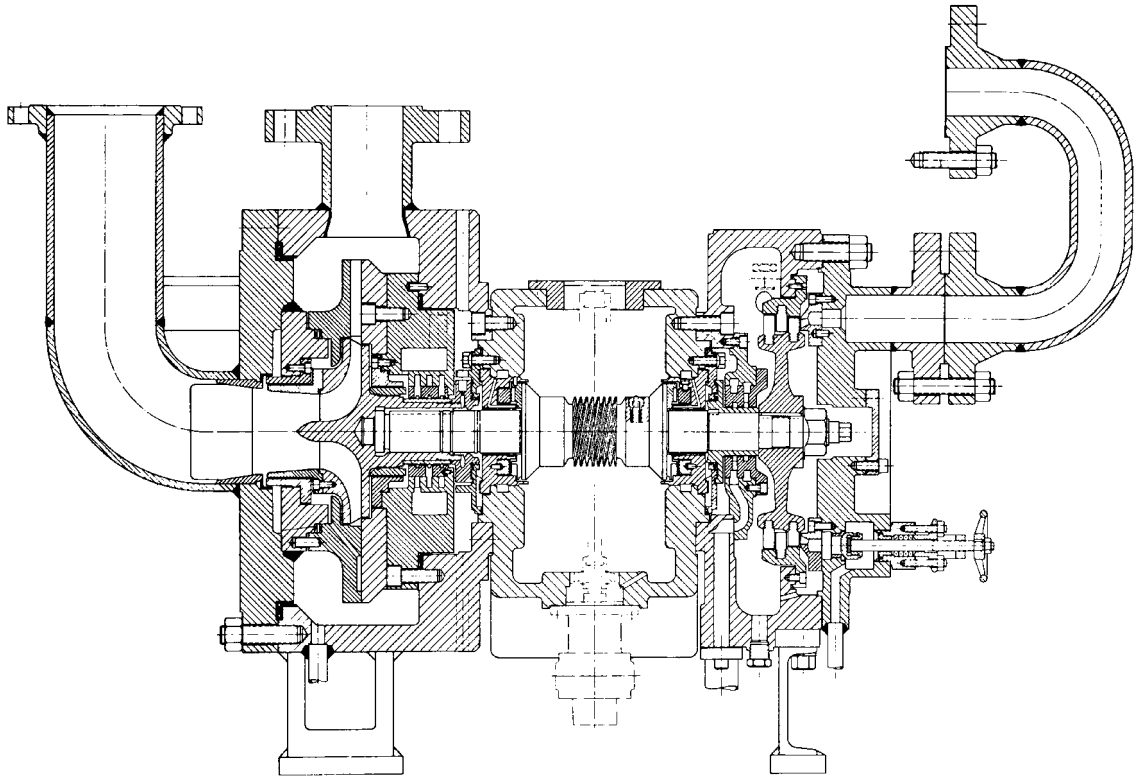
High-speed centrifugal pump and single-stage steam turbine mounted on a common shaft. Package is designed for boiler feed in marine, industrial, and process steam plants (Flowsolve Corporation).
